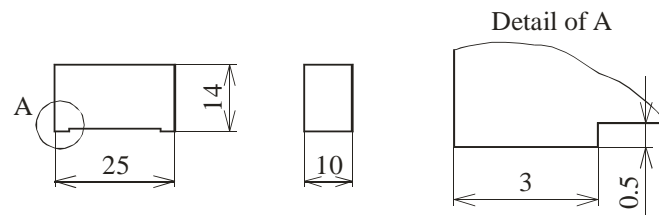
Shapes and sizes of the specimen and contact pad (dimensions are in mm):
